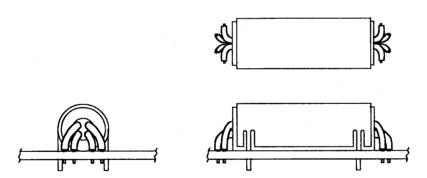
These picture frame matrix transformer modules have both the primary and secondary windings.
